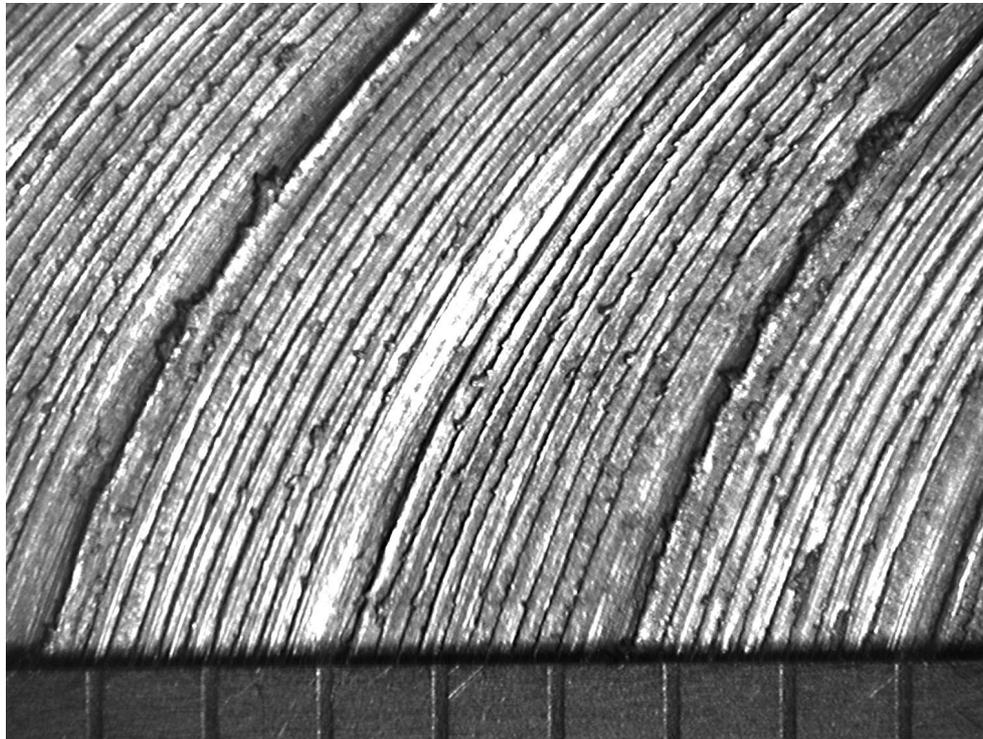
Close up of Re-stir™ weld surface formed beneath the tool shoulder showing surface rippling and reversal interval. Produced at 4 mm/sec (240 mm/min) welding travel speed), using 10 revolutions per interval.
